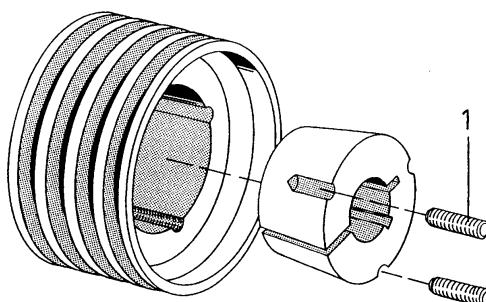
MOTOR SHEAVE AND BUSHING
